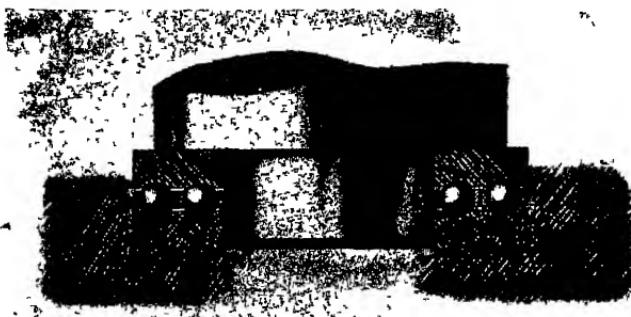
THE HOFFMANN DOUBLE ROW, HEAVY DUTY THRUST BEARING
